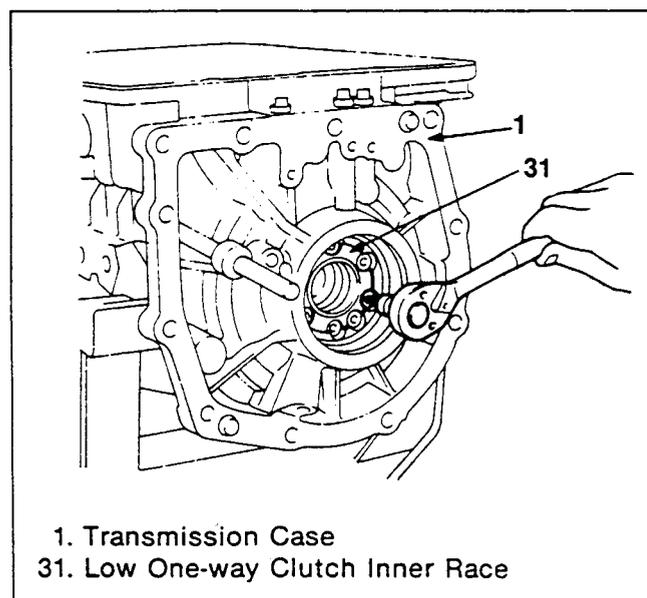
Low One-way Clutch Inner Race Bolt Removal
